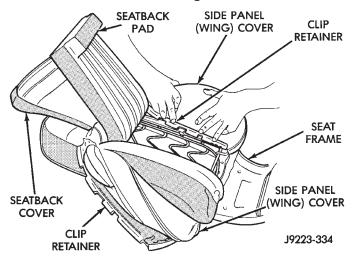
Side Panel (Wing) Cover Installation—Wingback Seat
